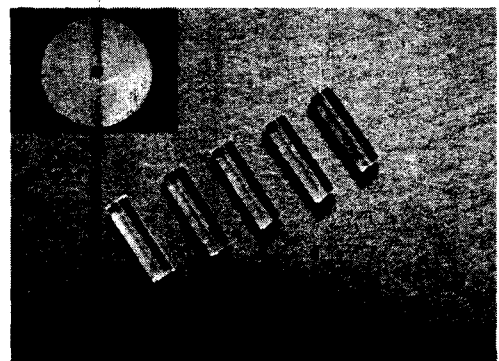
Photograph of Quartz glass ferrule by cutting machining
